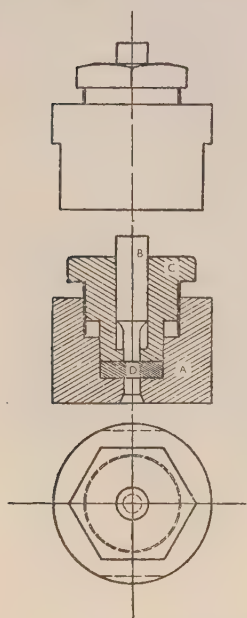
The $\frac{1}{4}$ -in. Punching Tool.
